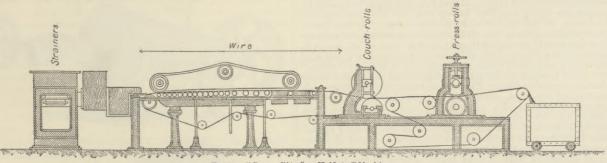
" Presse-Pâte," or Half-stuff Machine.
